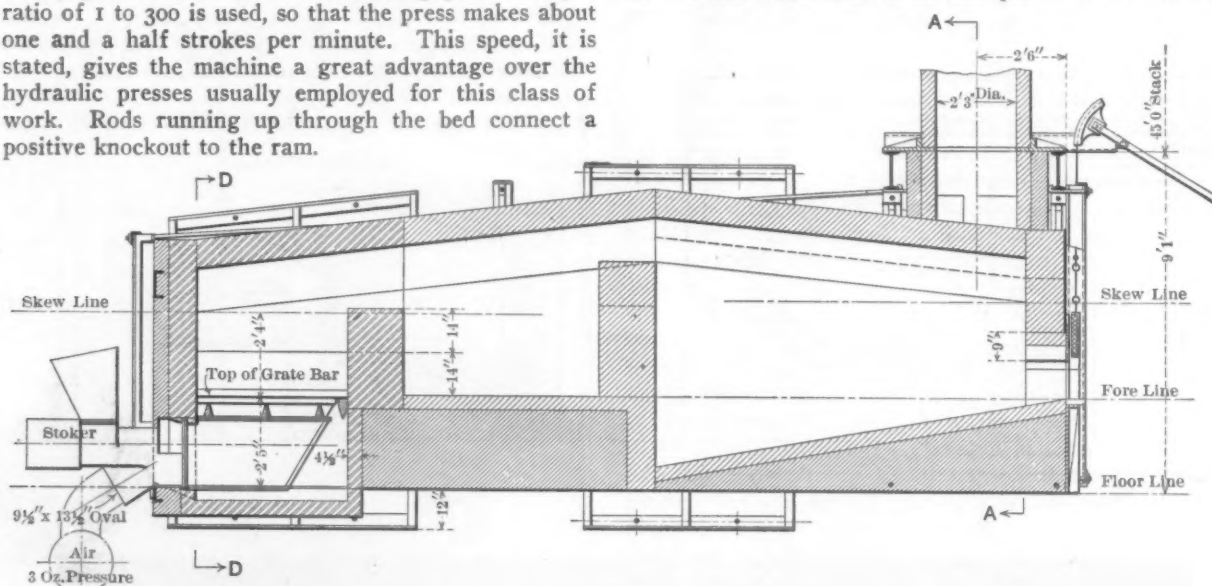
Longitudinal Section, Showing Tandem Arrangement of Bailey Stoker-Equipped Firebox, Pair Heating and Sheet Furnace.
